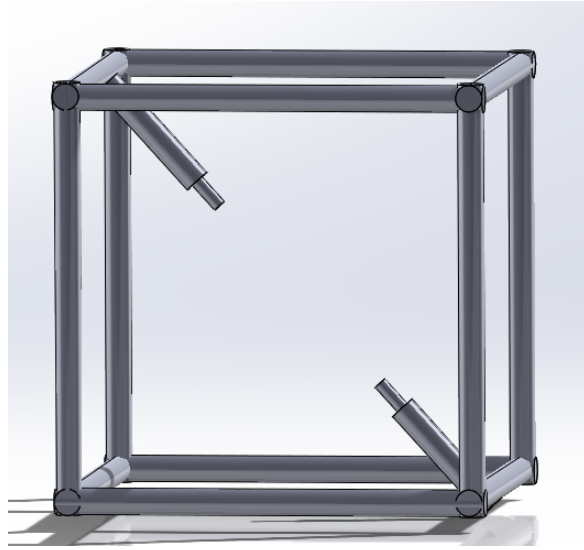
CAD Model of the body frame to which the BiOM test fixture is attached
